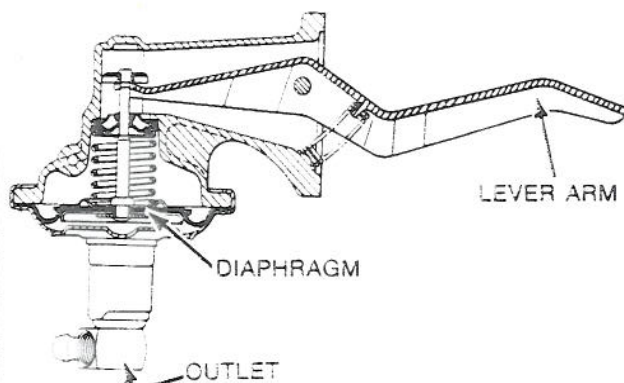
TYPICAL FUEL PUMP CUTAWAY
